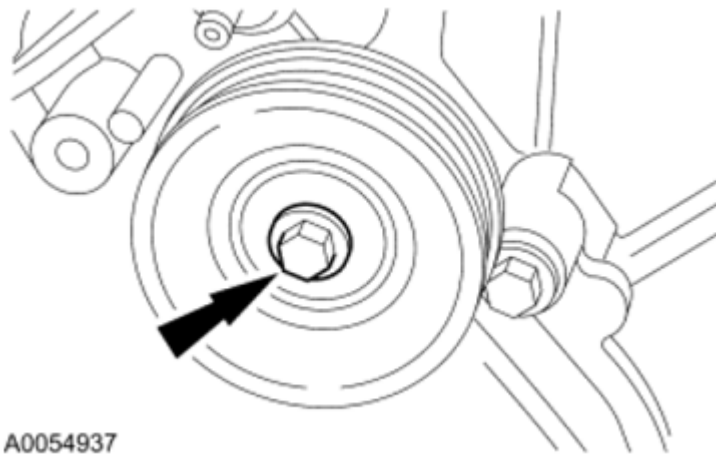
Locating Belt Idler Pulley Mounting Bolt
